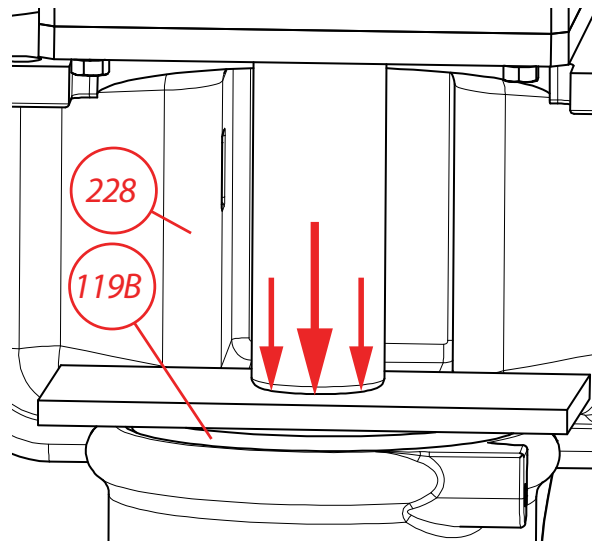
Press fit End Cover (119B) into bearing frame (228)
